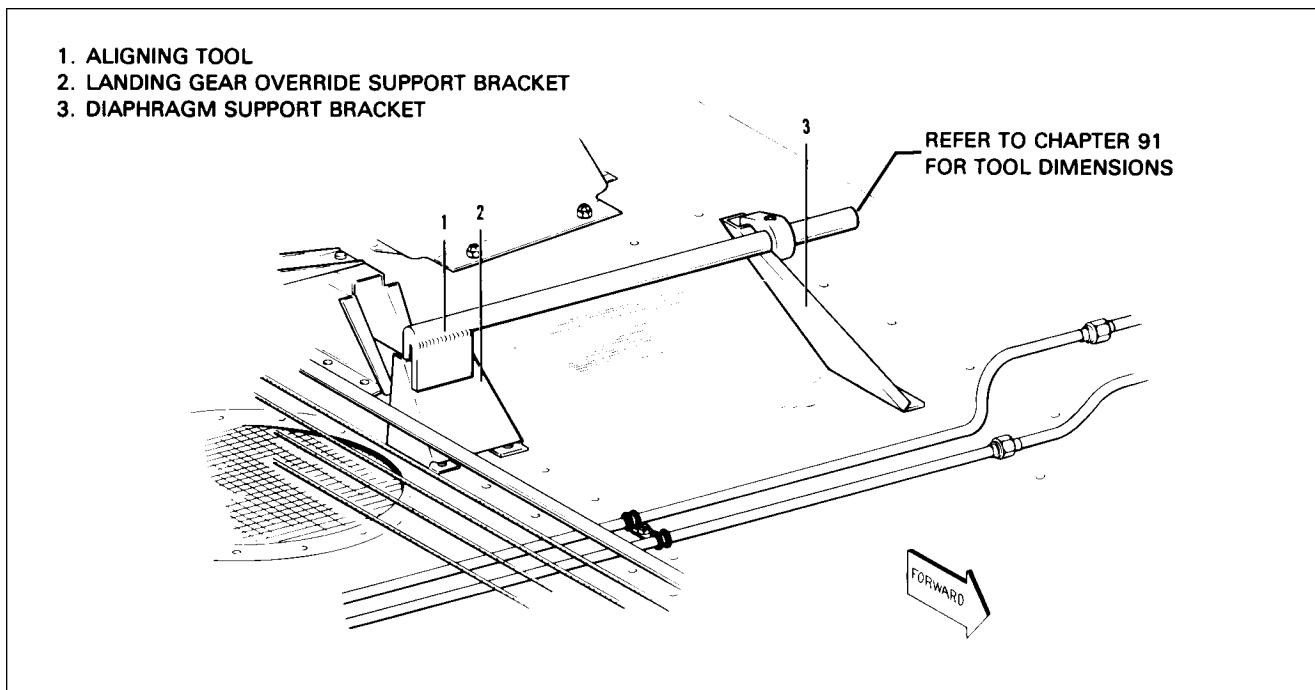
Checking Aligning Brackets of Gear Back-Up Extender Actuator
